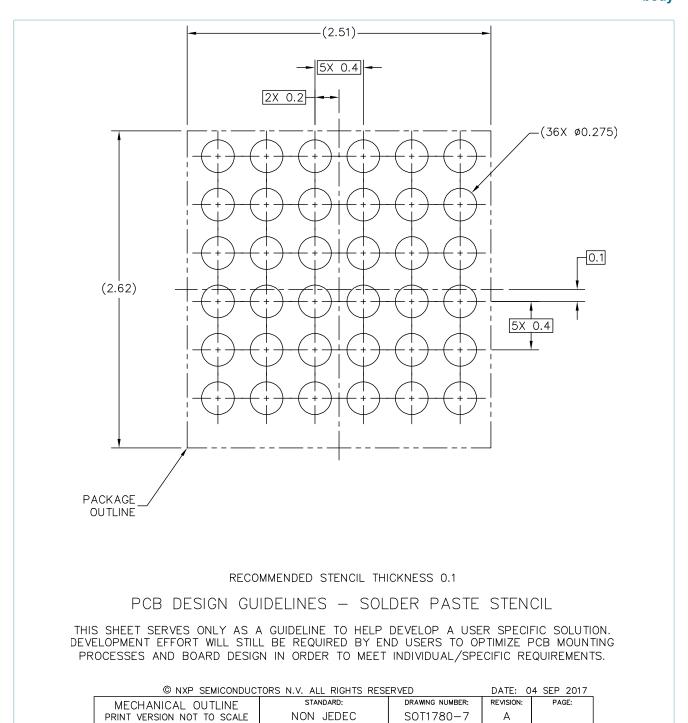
Reflow soldering footprint part2 for WLCSP36 (SOT1780-7)
